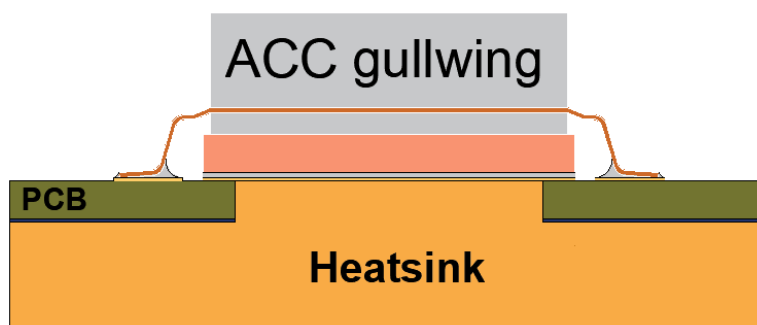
PCB bonded to a heat sink with a pedestal, intended for gullwing high-power packages
